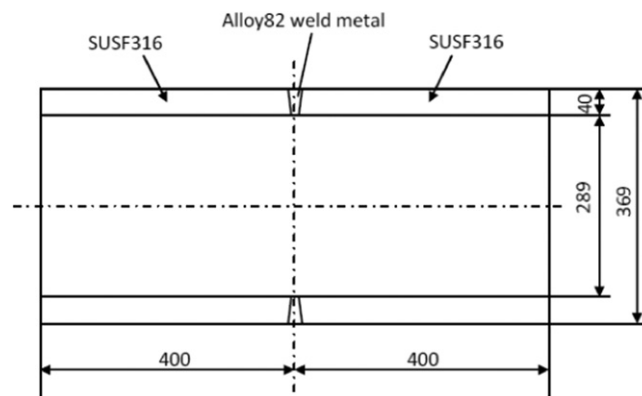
Schematic of girth-butt welded pipe. All dimensions in mm.
